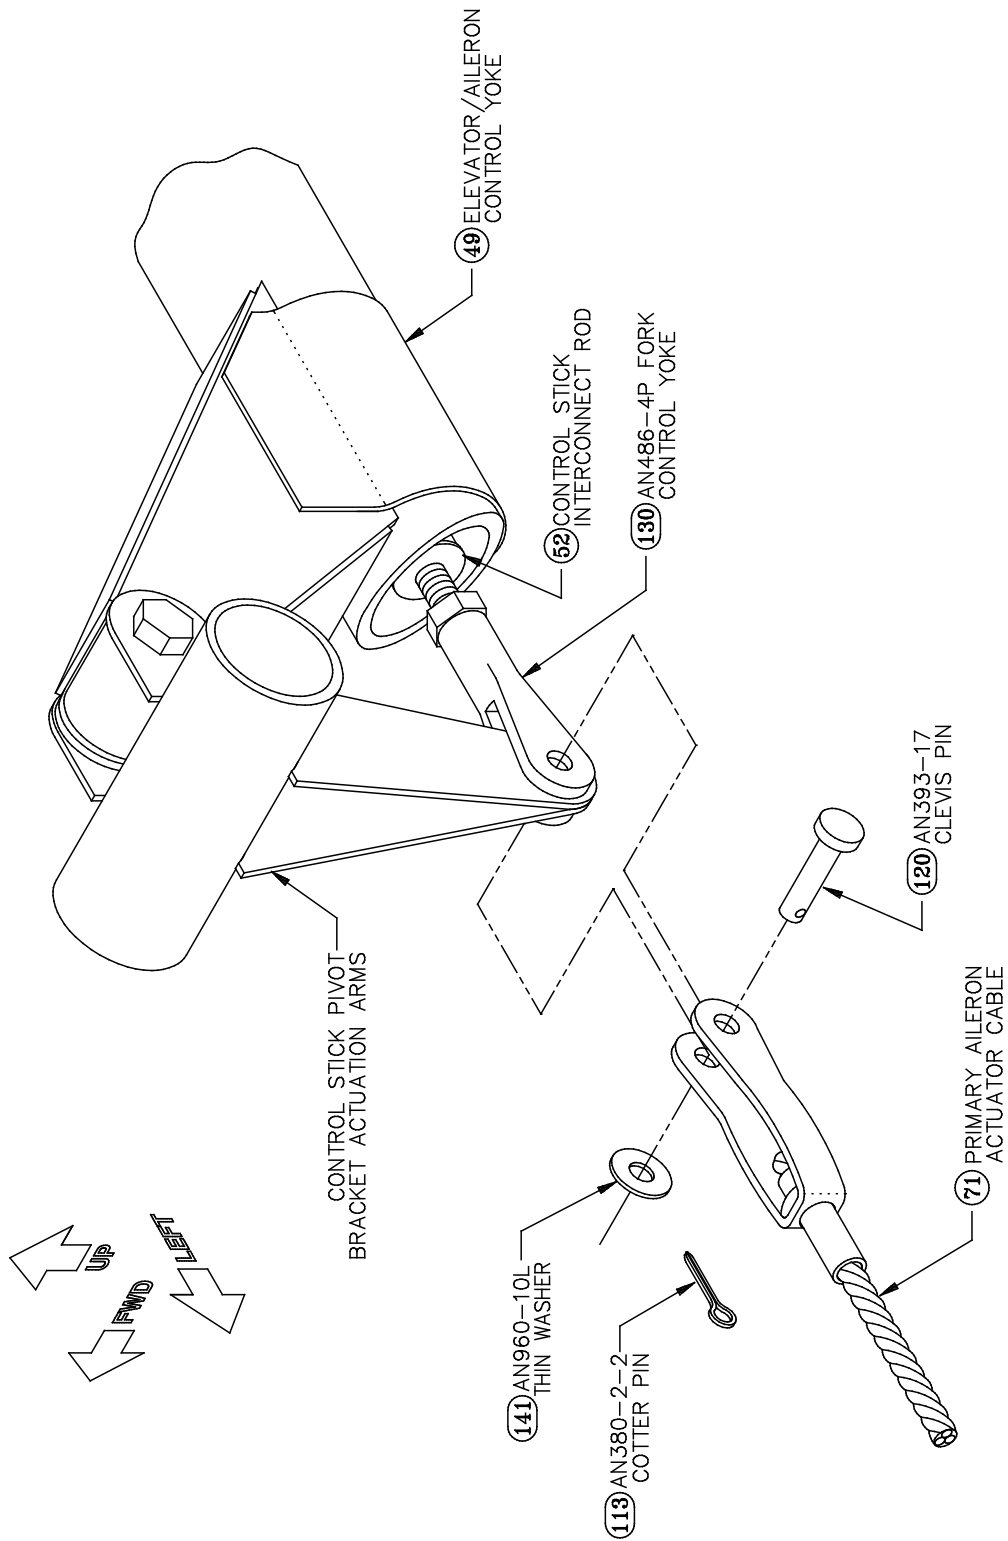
Aileron Control Cable Attachment to Control Stick Assembly
